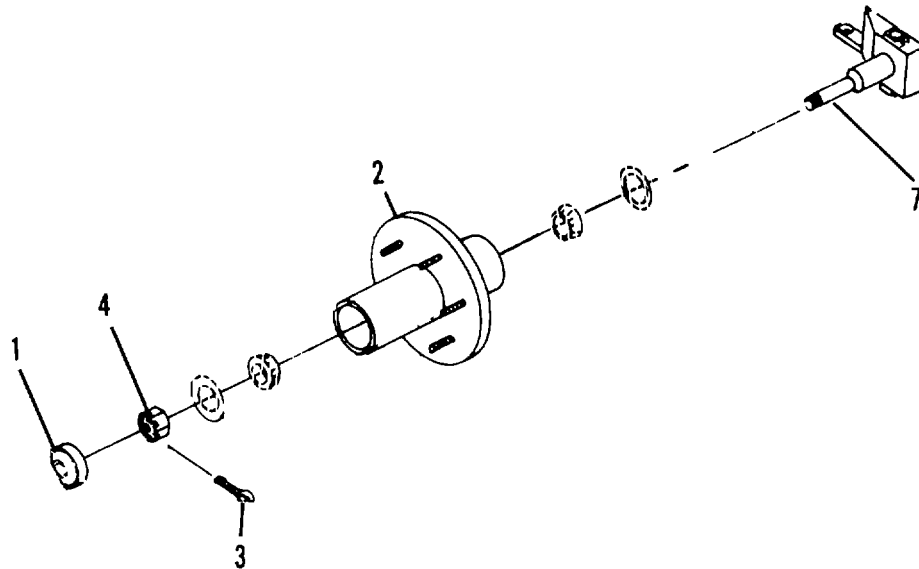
Steering Wheel Hubs and Bearings (Sheet 2 of 2).
